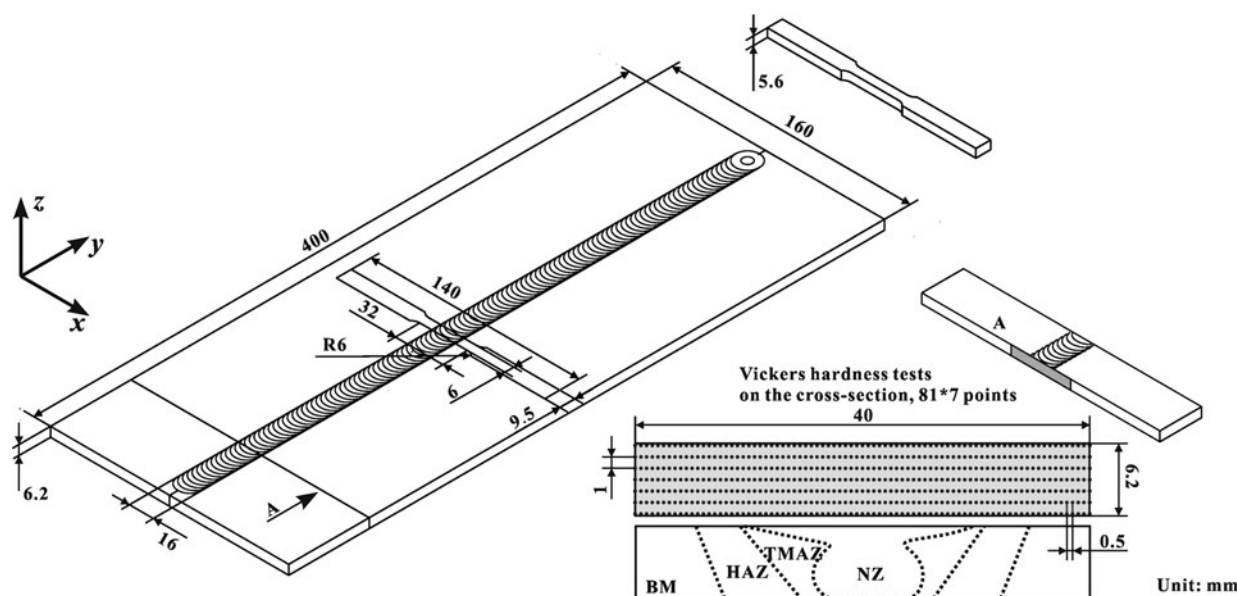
Schematic illustration of friction-stir-welded 6061Al-T651 joints showing fatigue specimen machining, microindentation hardness test path, and various zones (BM, HAZ, TMAZ, and NZ) across the weld.<sup>[32]</sup>
